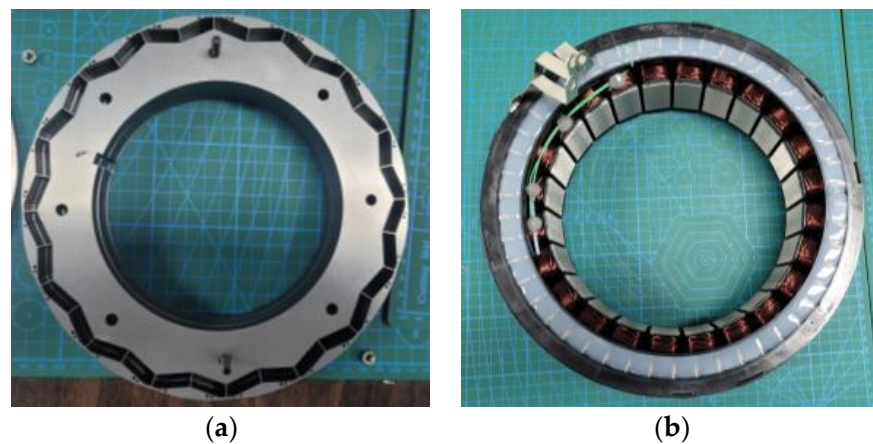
Rotor and stator fabrication pictures; (a) rotor; (b) stator.
